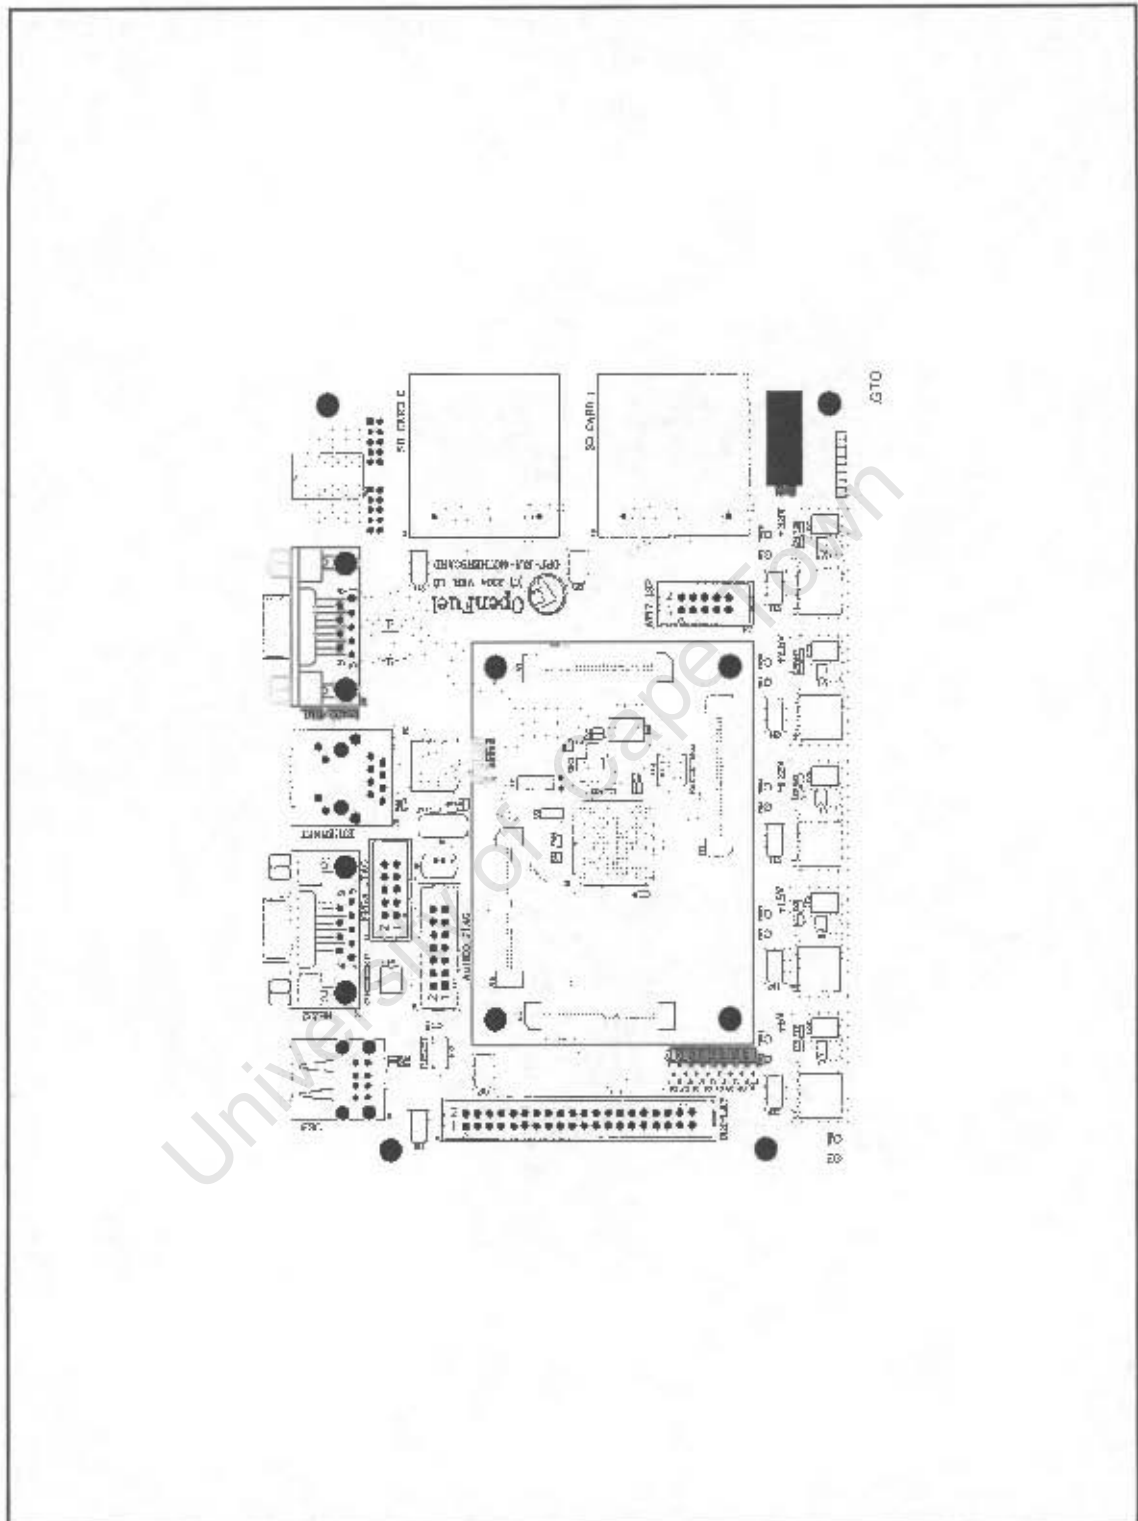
RUI Motherboard PCB Layout - Top Overlay Layer
